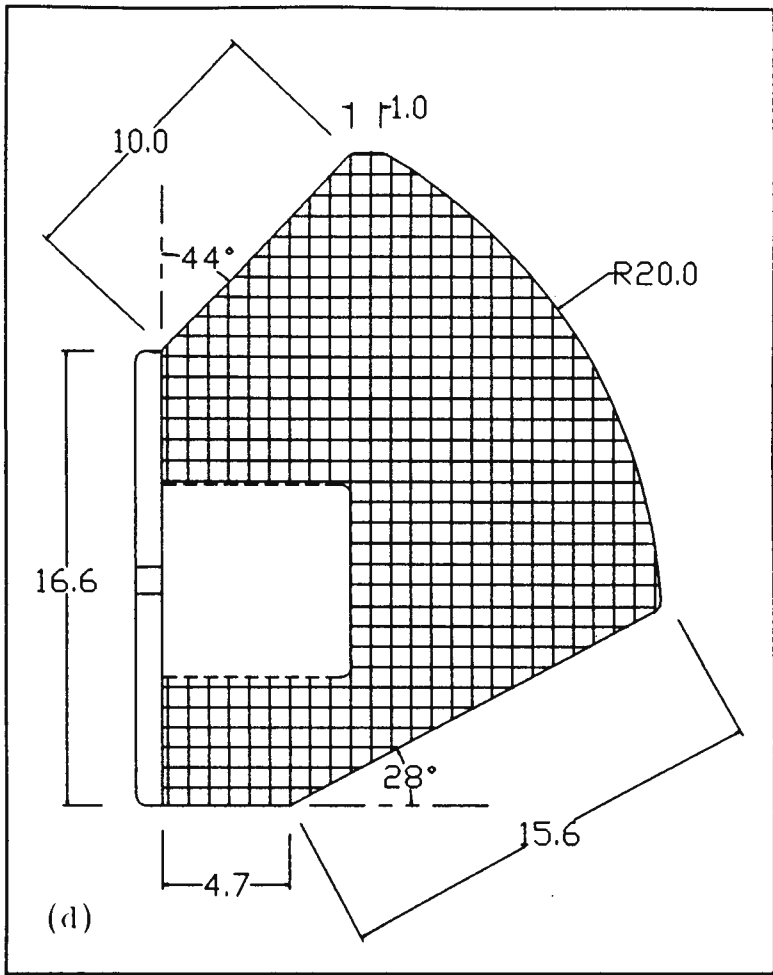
Ulnar component extra-articular design: (d) bottom view showing "cross-hatched" pattern.
